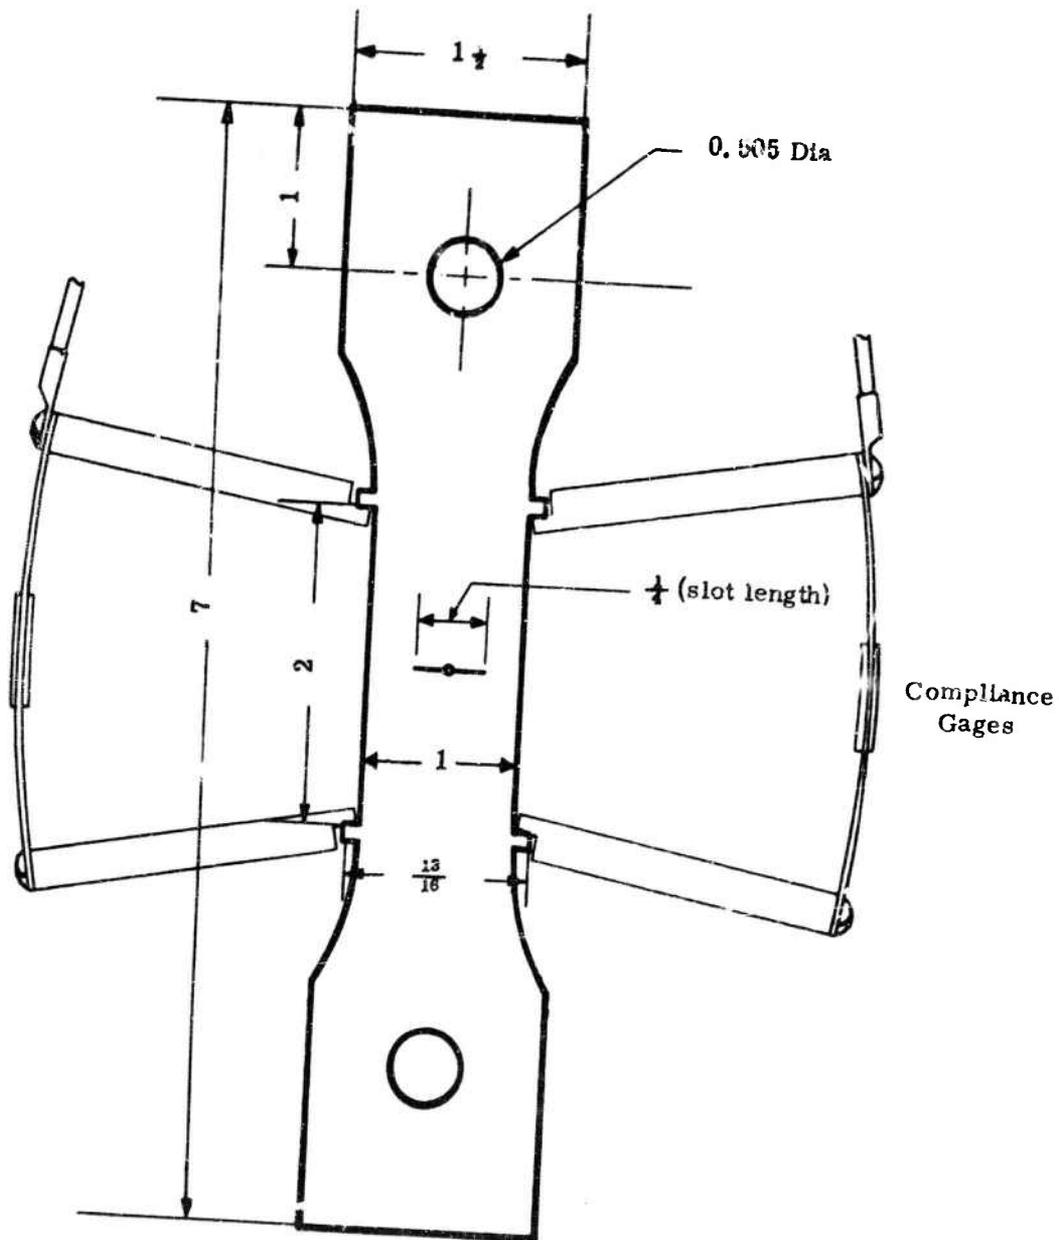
Fracture-Toughness Specimen and Compliance Gage for Sheet Alloys
